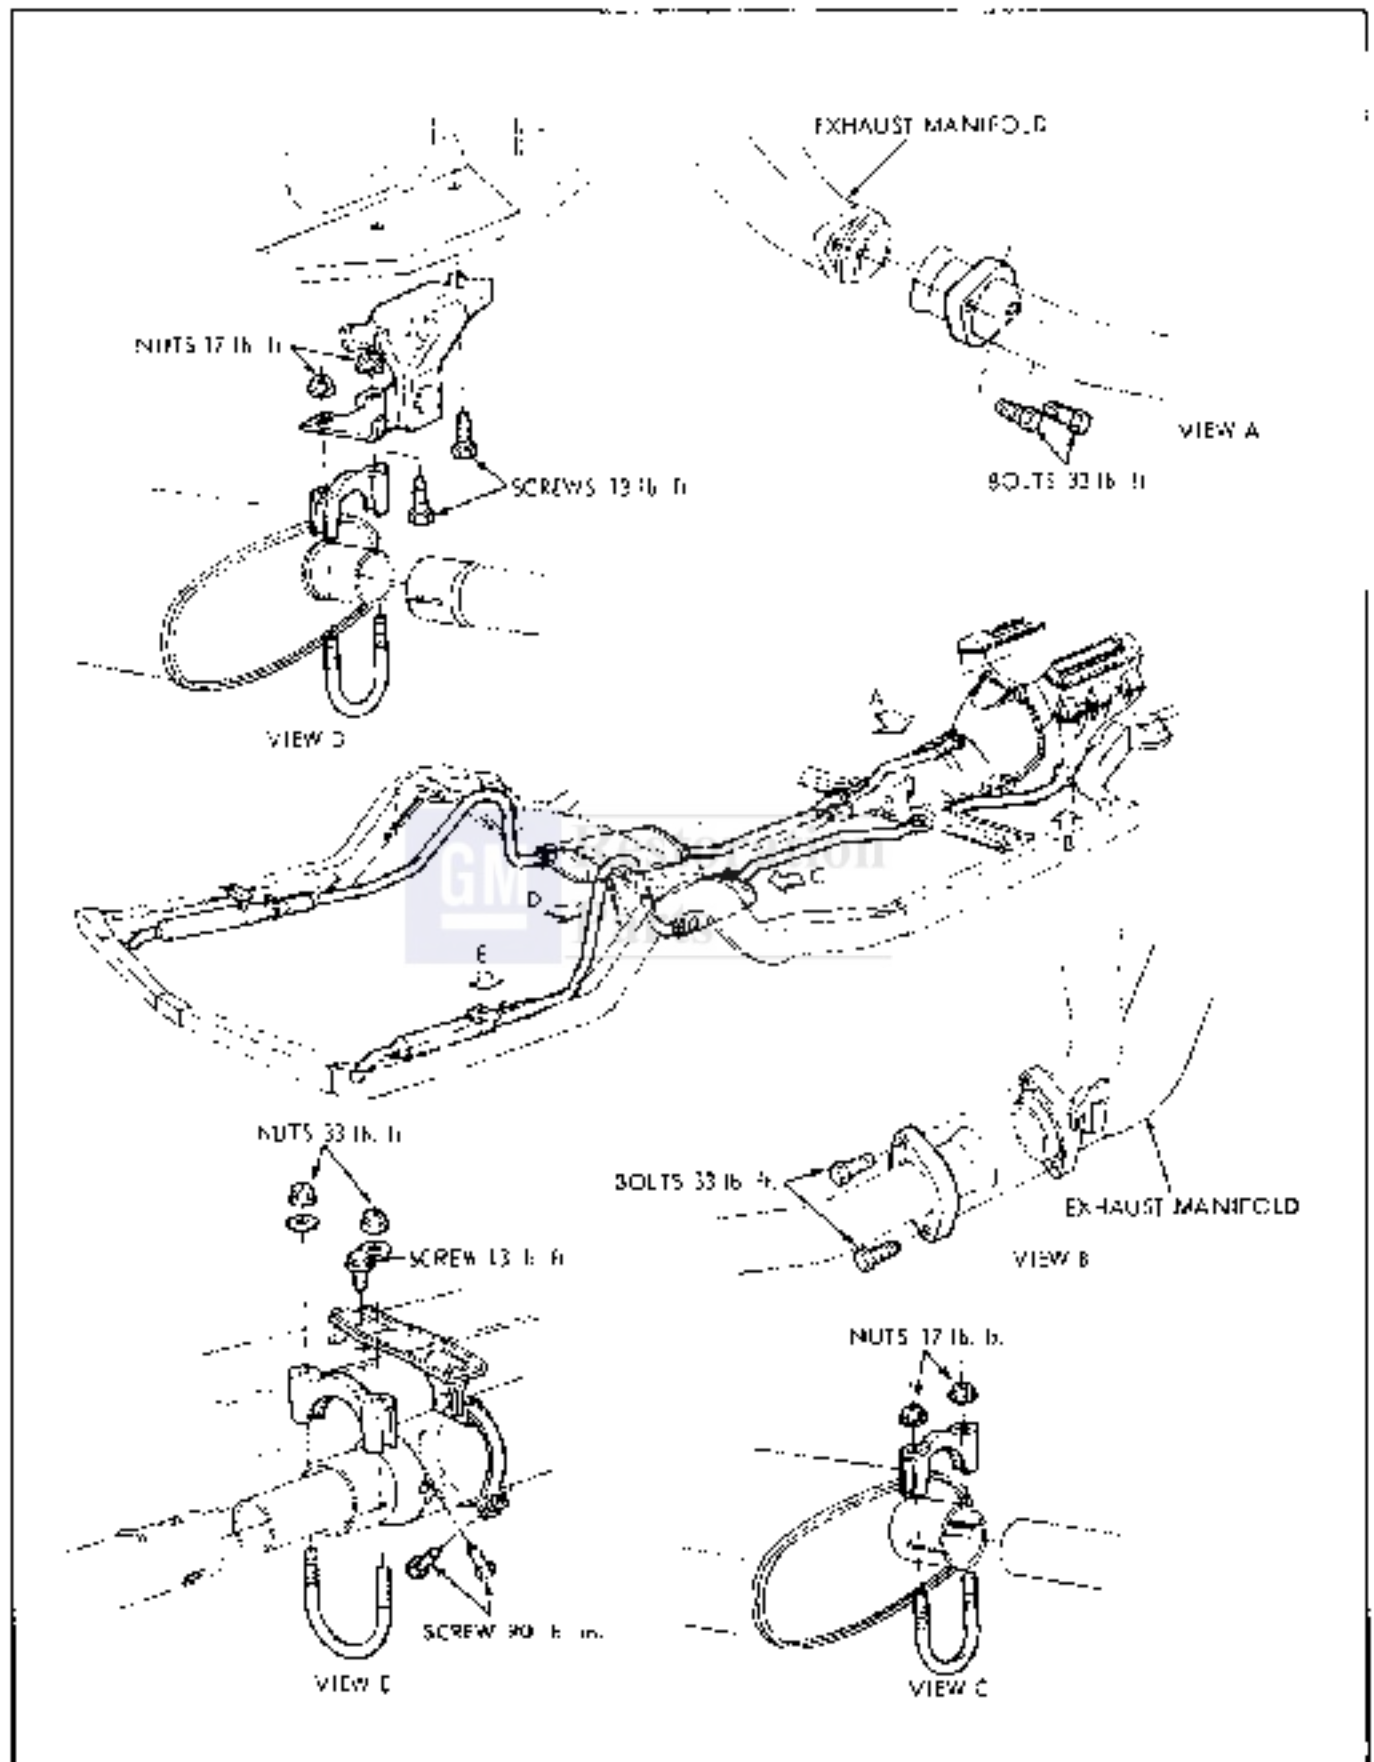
Peritac Dual Exhaust System 428-376 Engine
